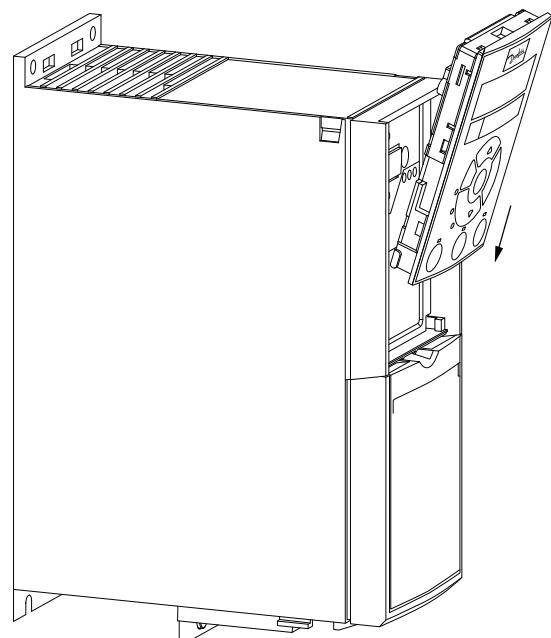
Aligning Bottom of VFD Keypad with Opening in VFD Front Panel
